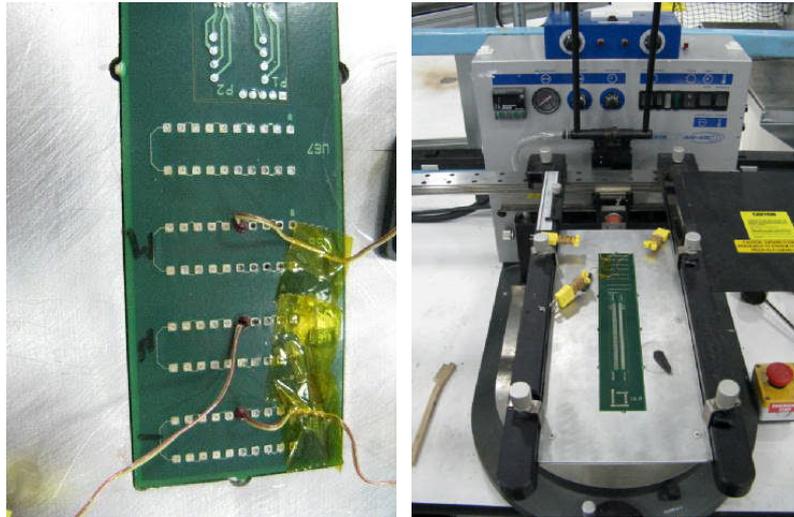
Left - Thermocouple Placement; Right - Wave Solder Equipment with Test Coupon
